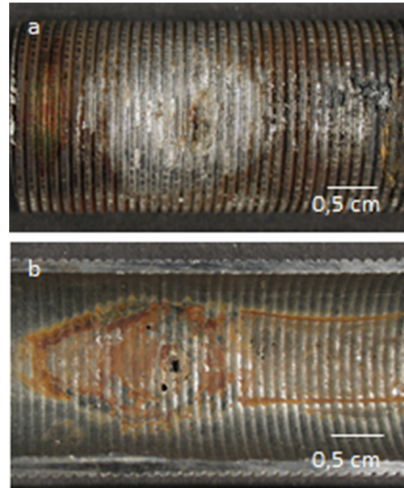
Macrographs of the stainless steel pipe external (a) and internal (b) surfaces.
